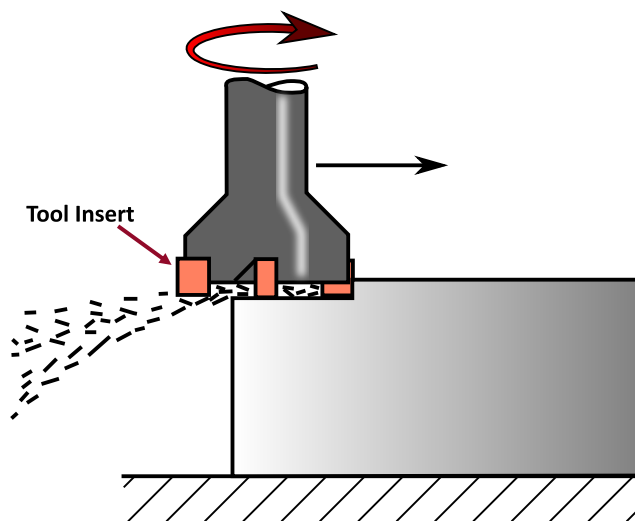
A milling tool has several tool inserts on it. As the tool rotates and is pushed forward, the inserts cut into the metal (wikipedia, 2020).
